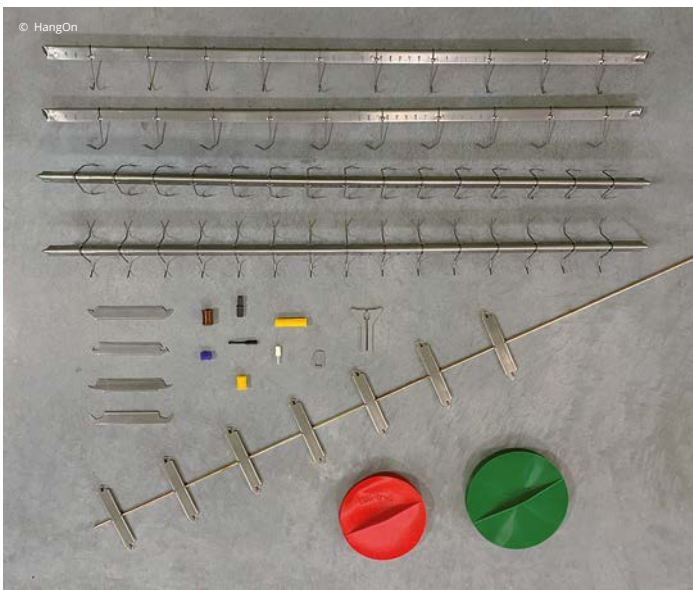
The HQL bar is produced fully automatically: here, hooks with a diameter of 1 mm can be inserted on both sides to hang the workpieces symmetrically.
